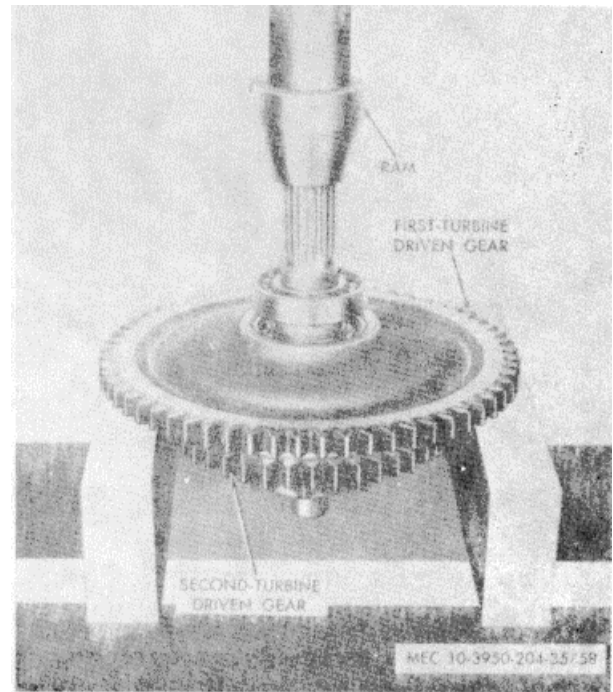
Pressing second turbine driven gear and freewheel unit out of first turbine driven gear.
